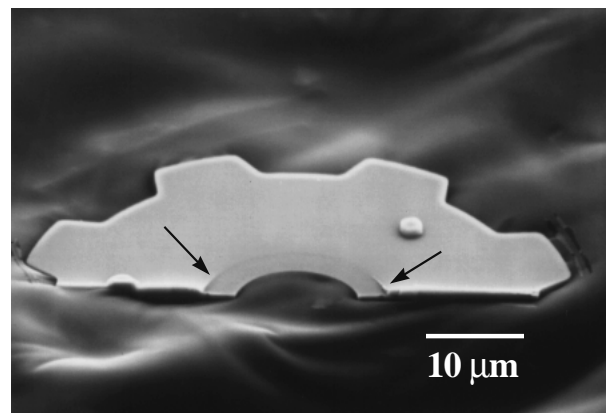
Micro-sectioned gear bottom surface showing FIB re-deposited material (arrows).
